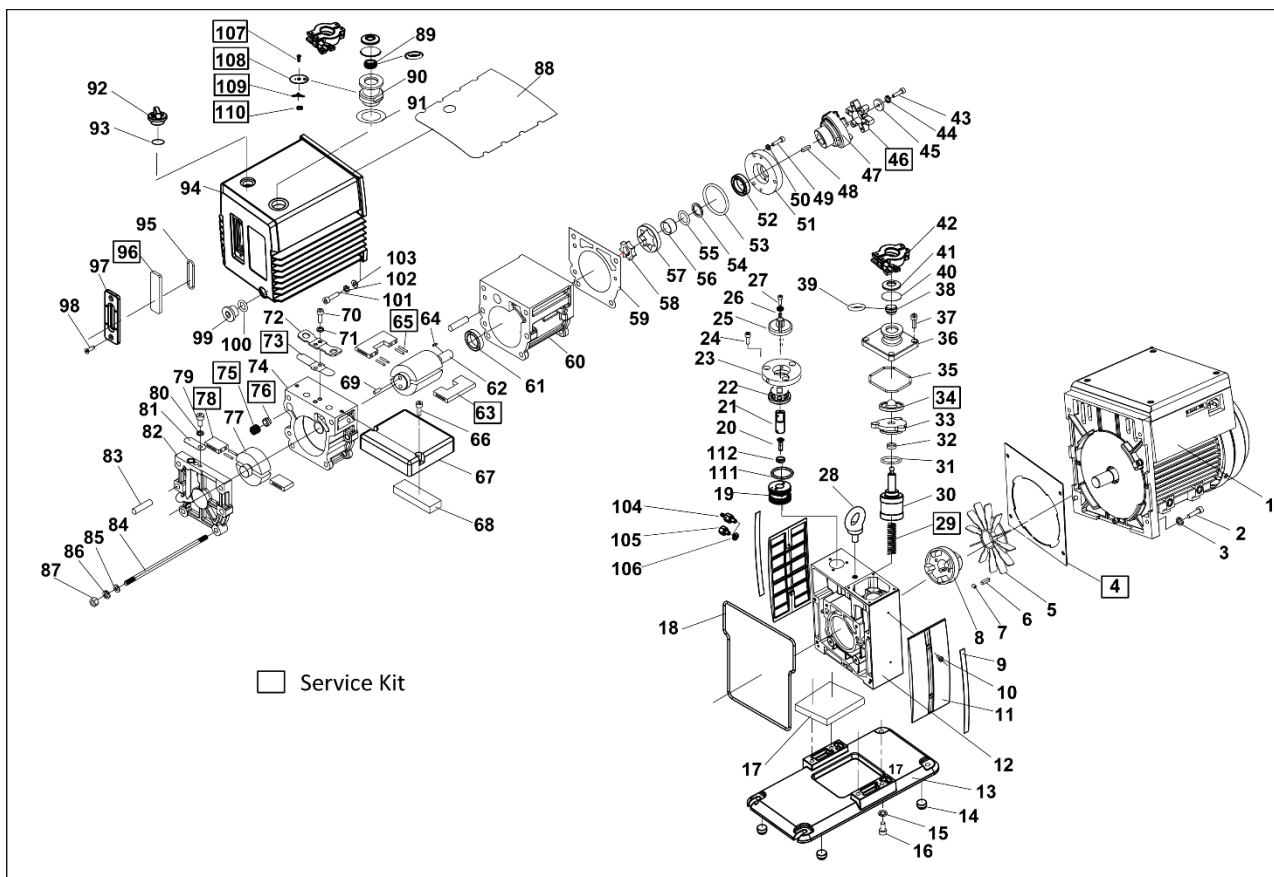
Explosion view - Rotary vane pump with service kit – positions (RV18+)
